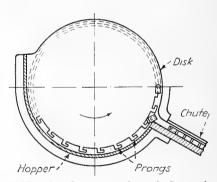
Another type of vertical rotating disk hopper for feeding hollow cylindrical pieces having a blind hole. Prongs are milled on the periphery of the disk; these prevent work from being fed open end up into the chute.
